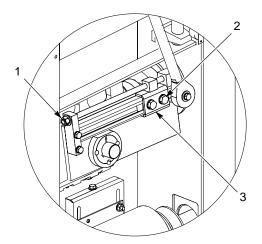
Stroke Adjustment - Slide-Type Crank Arm
